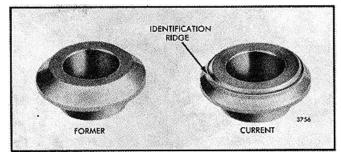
Former and Current Exhaust Valve Spring Caps (Four-Valve Heads)
